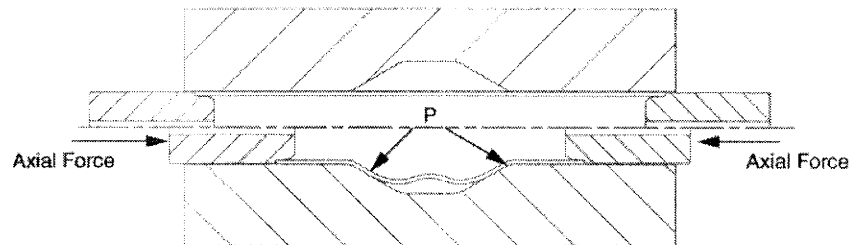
Tube forming involving application of internal pressure and axial load (Singh, 2003).
